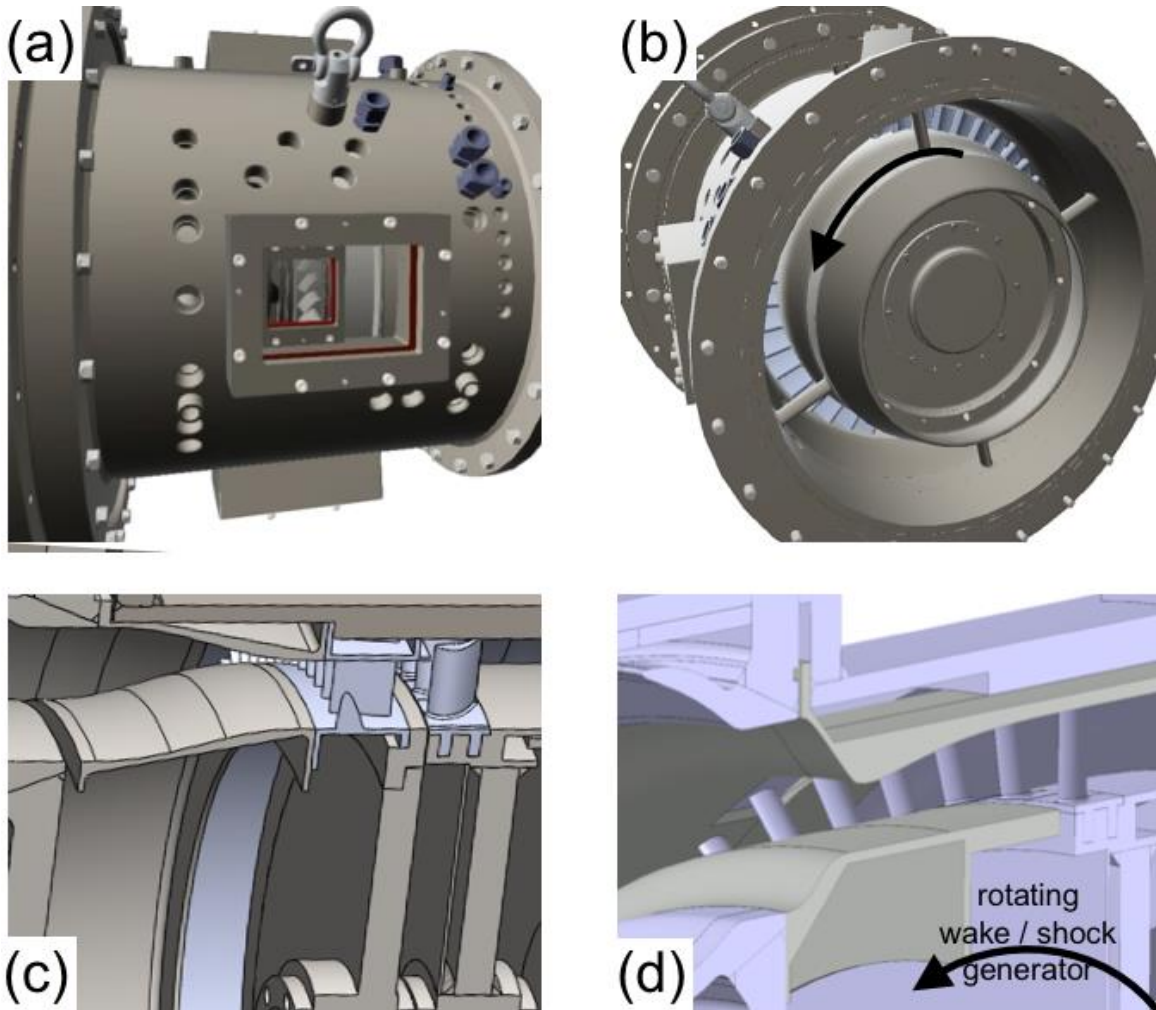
Annular test section: a) Overall layout of the optical windows; b) frontal view of the test section; c) meridional view; d) supersonic configuration.
